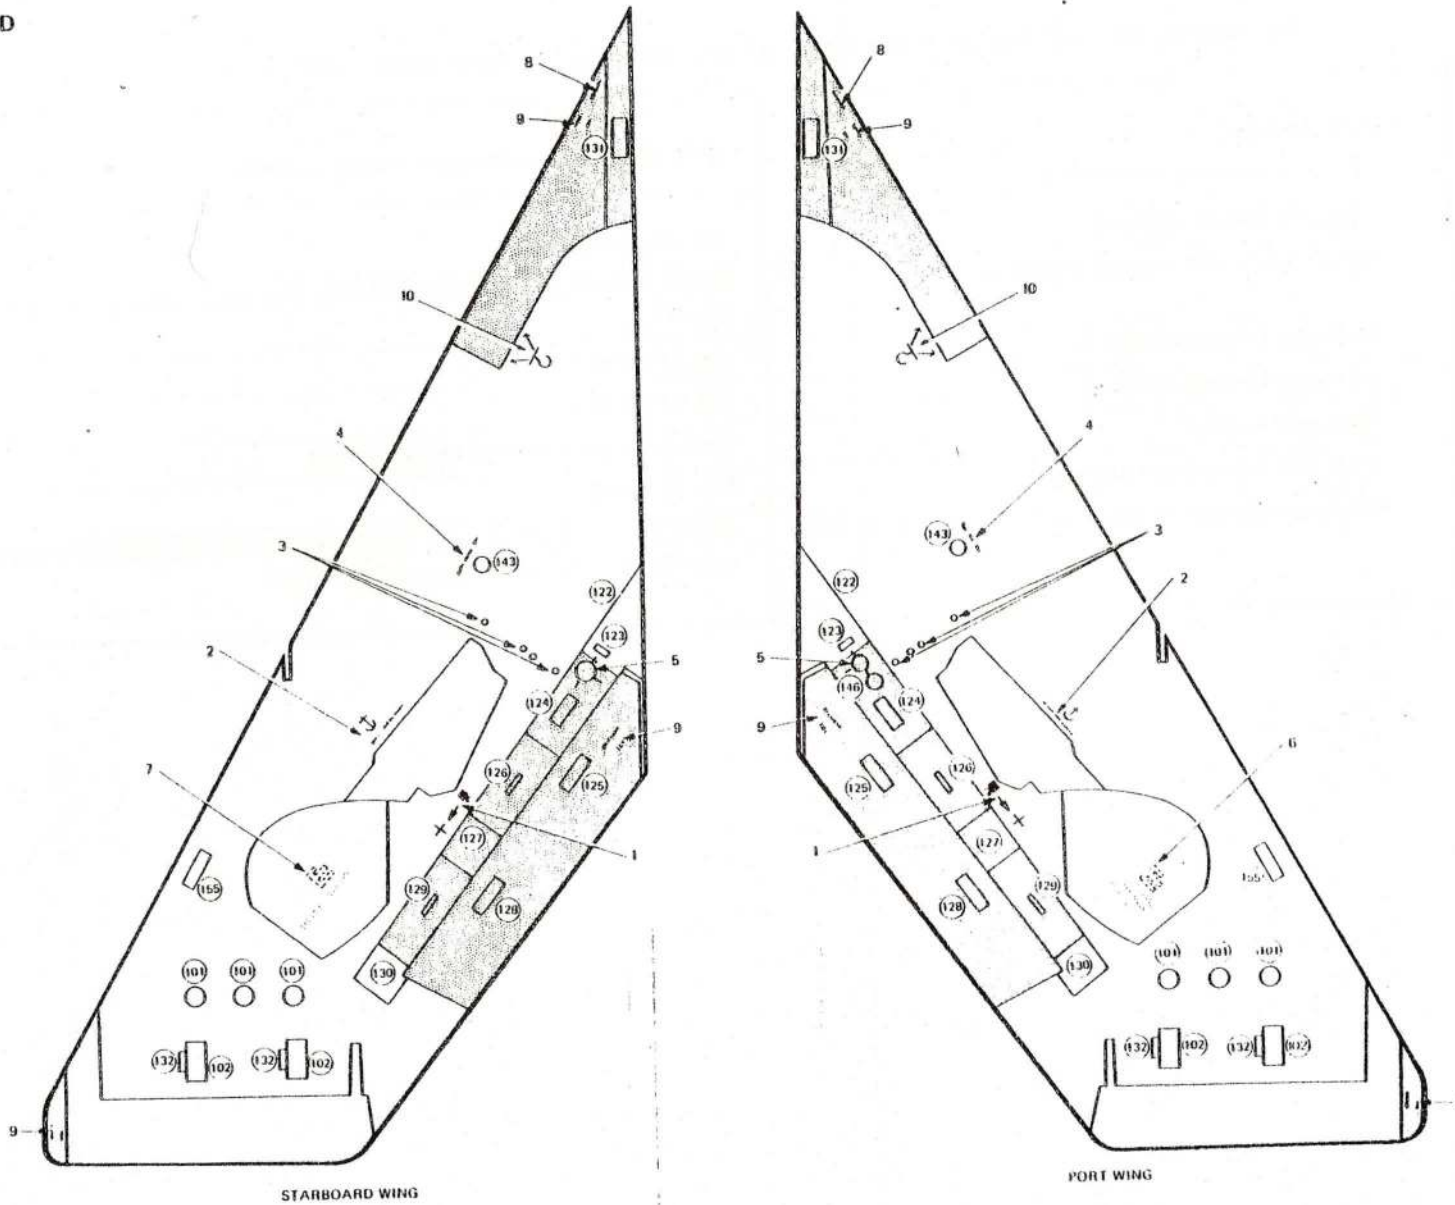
EXTERNAL MARKINGS - MAINPLANES - LOWER SURFACES - SERVICING
